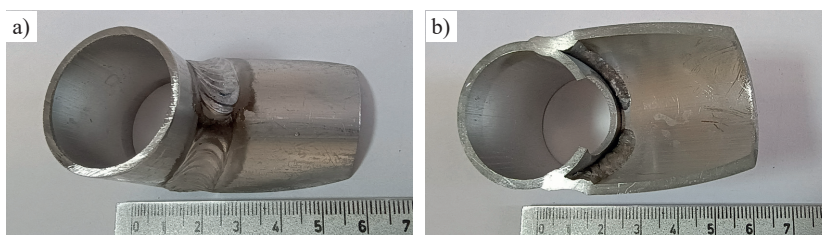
MIG connection of pipes with a wall thickness of 2 mm: a) weld face; b) joint cross-section
